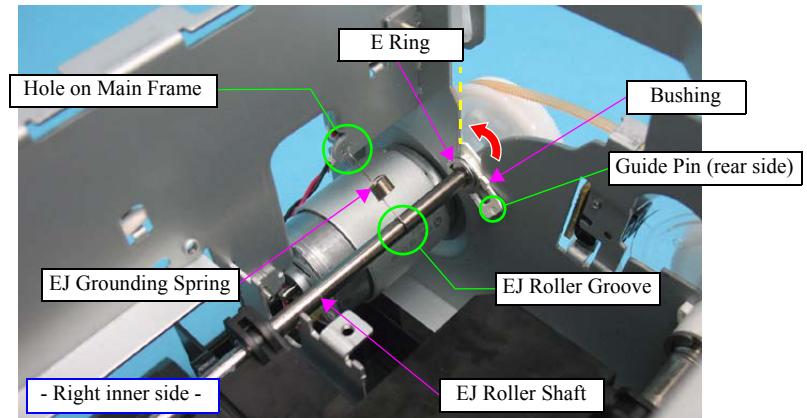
Removing the Front Paper Guide & EJ Roller Assy (2)
